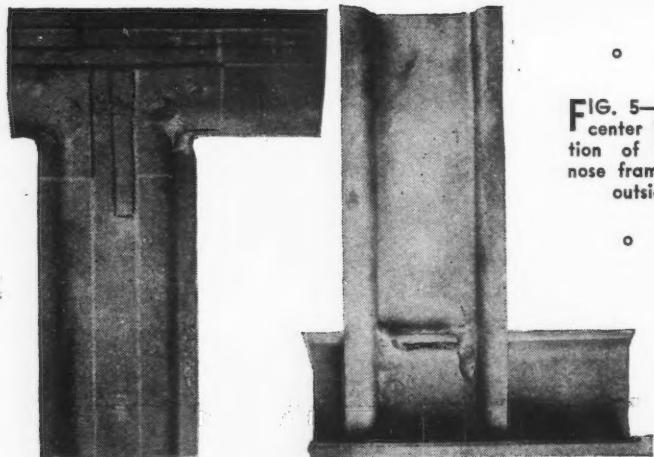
Welded steel center joint construction of B-29 bomber nose frame, inside and outside views.
